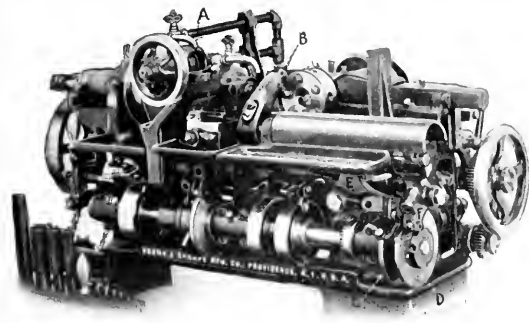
Brown & Sharpe Automatic Screw Machine with Screw Slotting Attachment.
